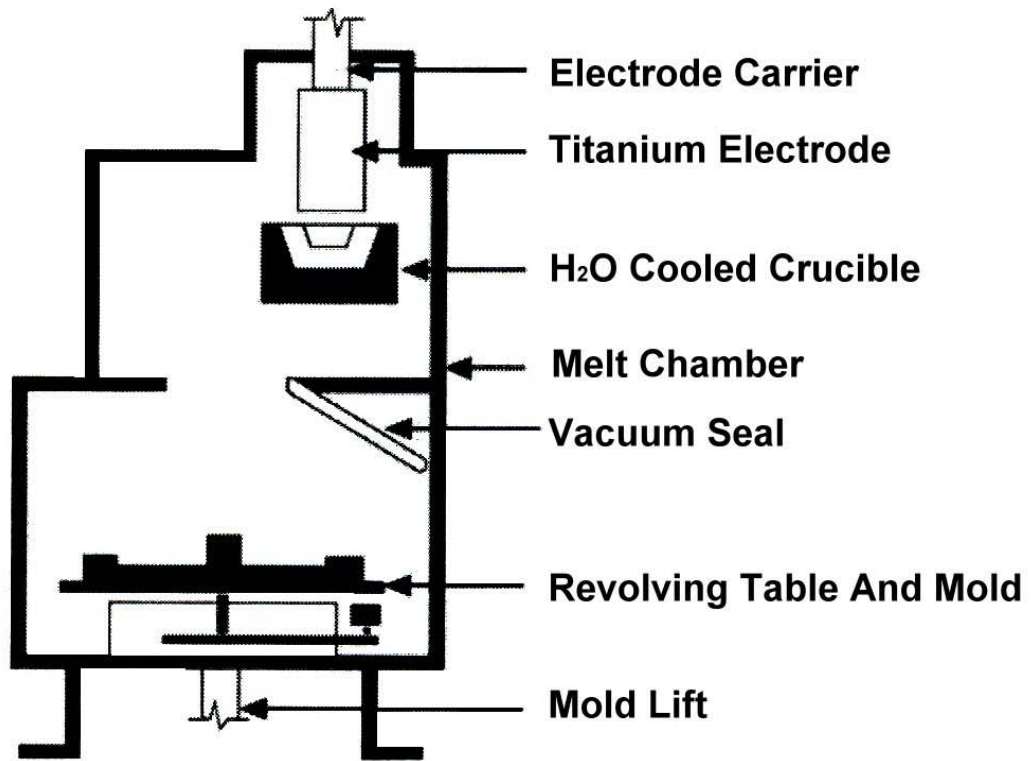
Schematic of a vacuum casting furnace used for making titanium castings.
